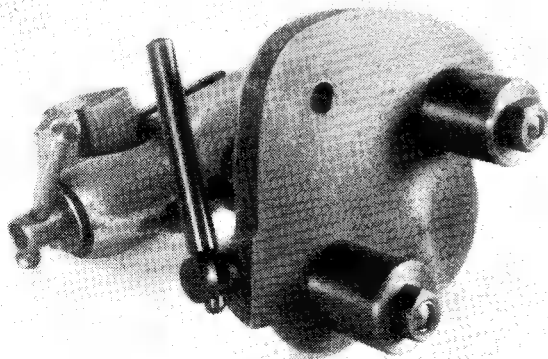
Underside of the Offen vice, showing position of the clamping-pieces
